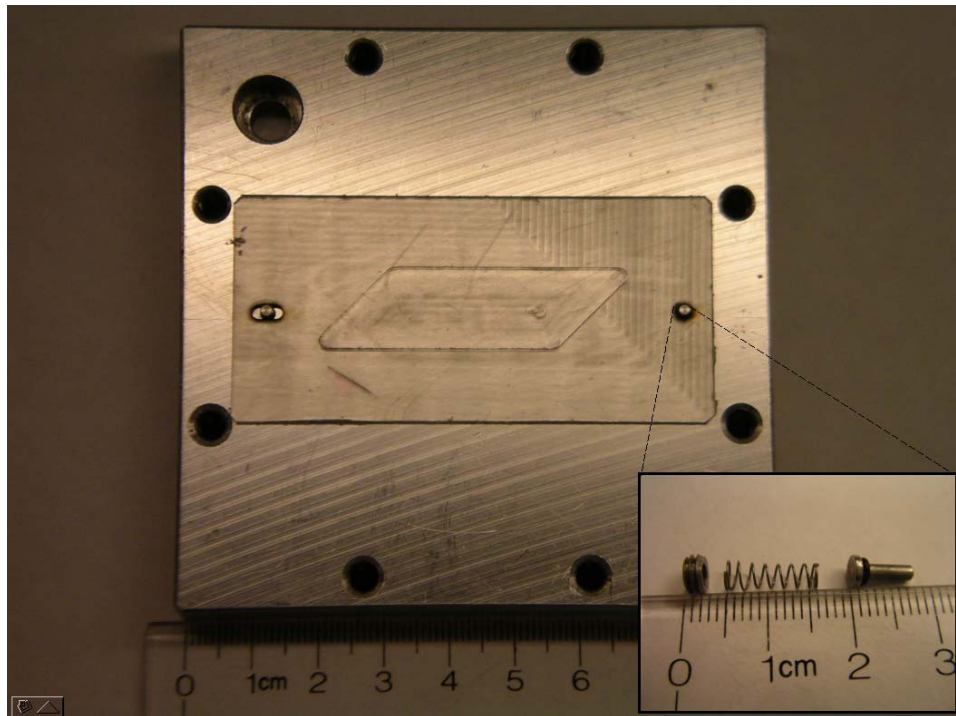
Registration fixture for MNM. Used to align the APET parts during Clearweld deposition and transmission laser welding. Inset picture shows a disassembled alignment pin. The pins are independently supported by compression springs that prevent damage to the quartz plate used for clamping.
